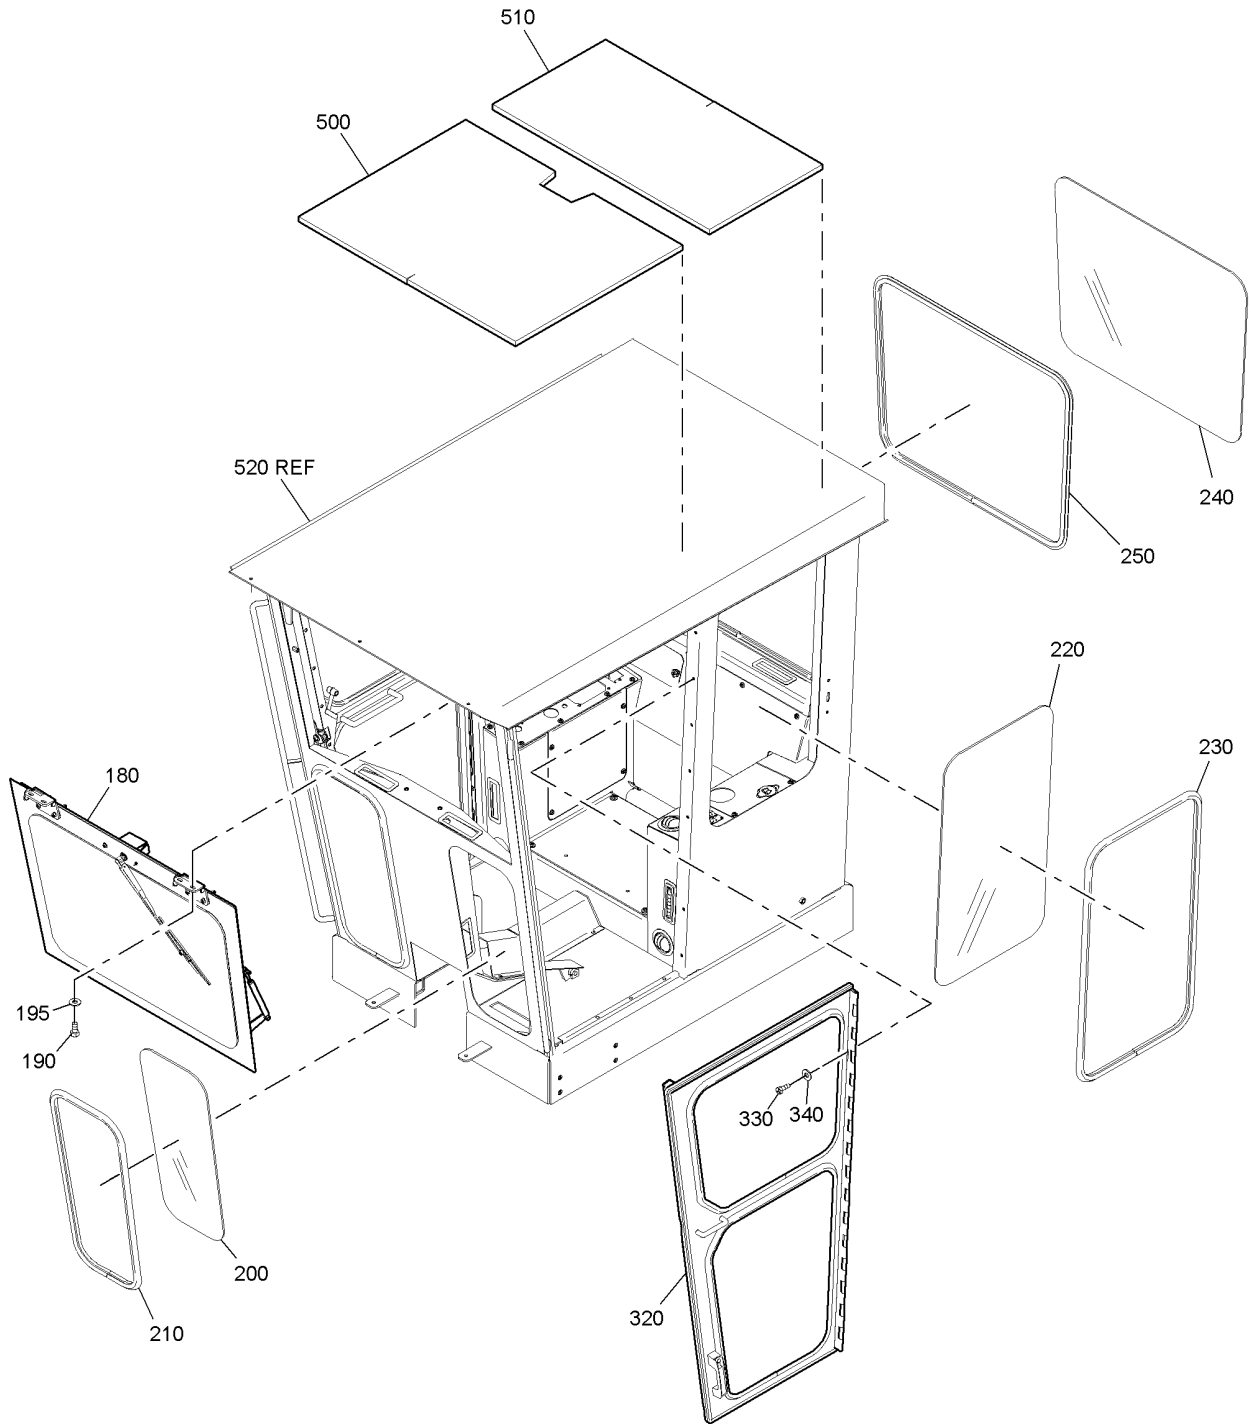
CAB ASSEMBLY (LEFT SIDE VIEW) (SHEET 2 OF 4)
